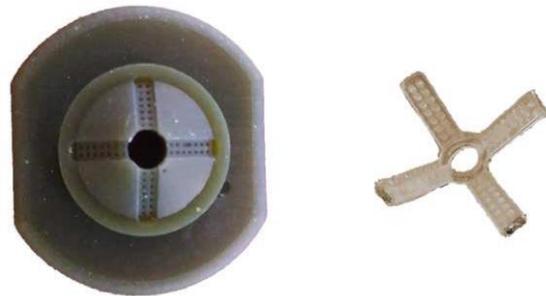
Micro injection molding inserts (left) and resulting injection molded part (right).
